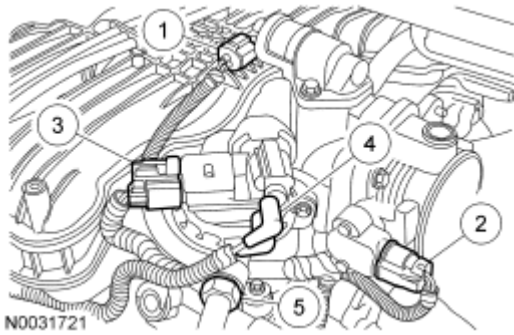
Identifying EGR System Module Vacuum Connector & Throttle Position Sensor Electrical Connector
